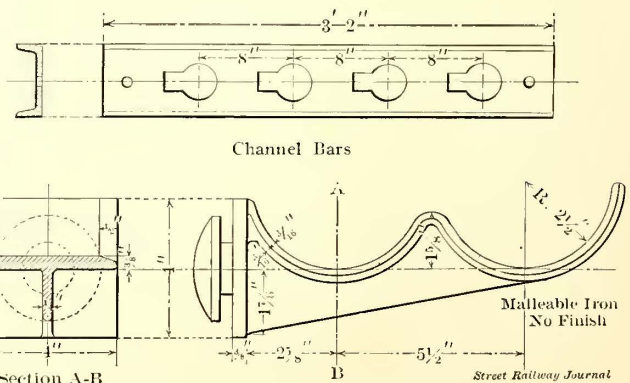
DETAILS OF CHANNELS AND HANGERS
